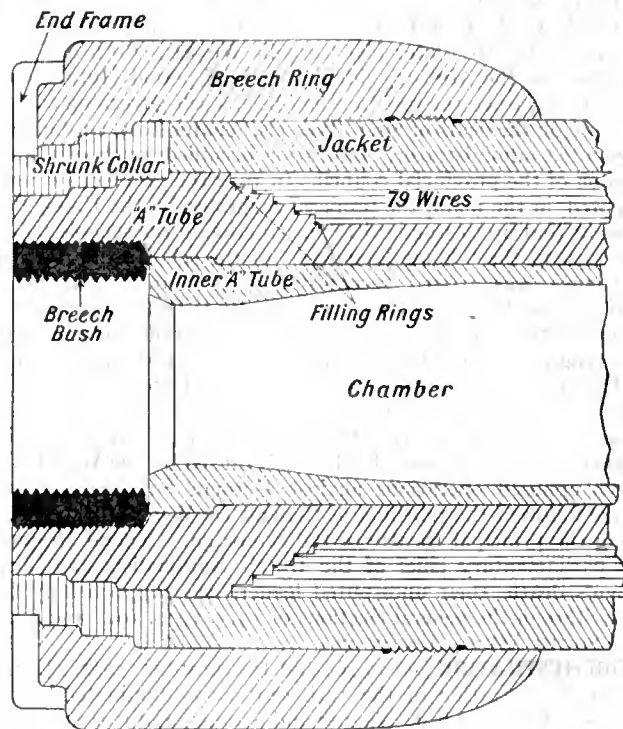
Sectional view of breech end of B.L. 15-in. gun.
